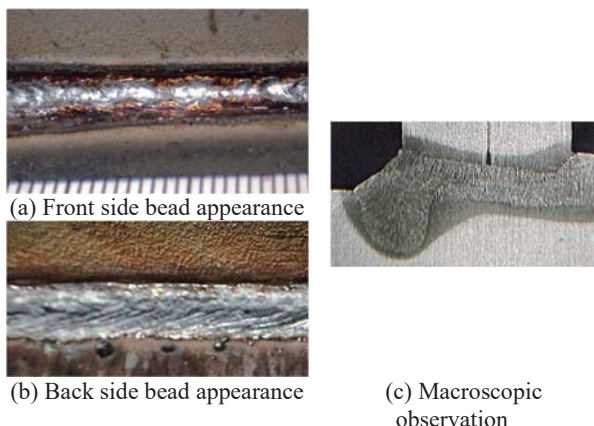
Weld bead appearance and macroscopic observation (ID: T2).
